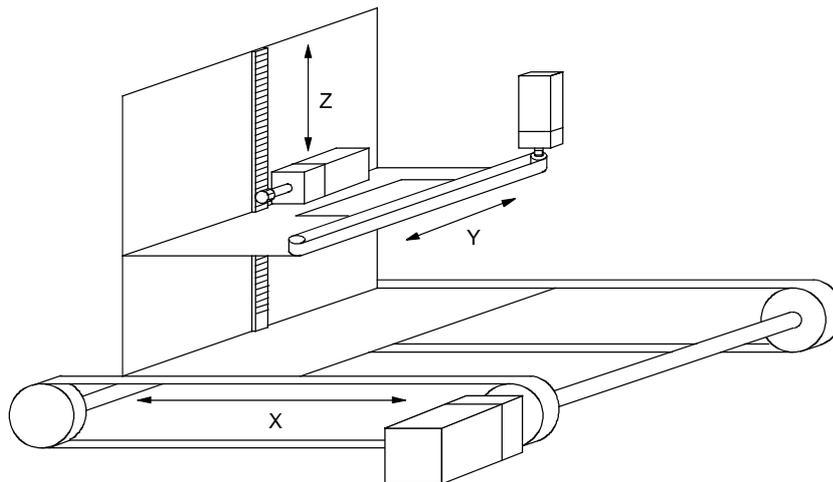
Line drawing of a three-axis conveyor vehicle
